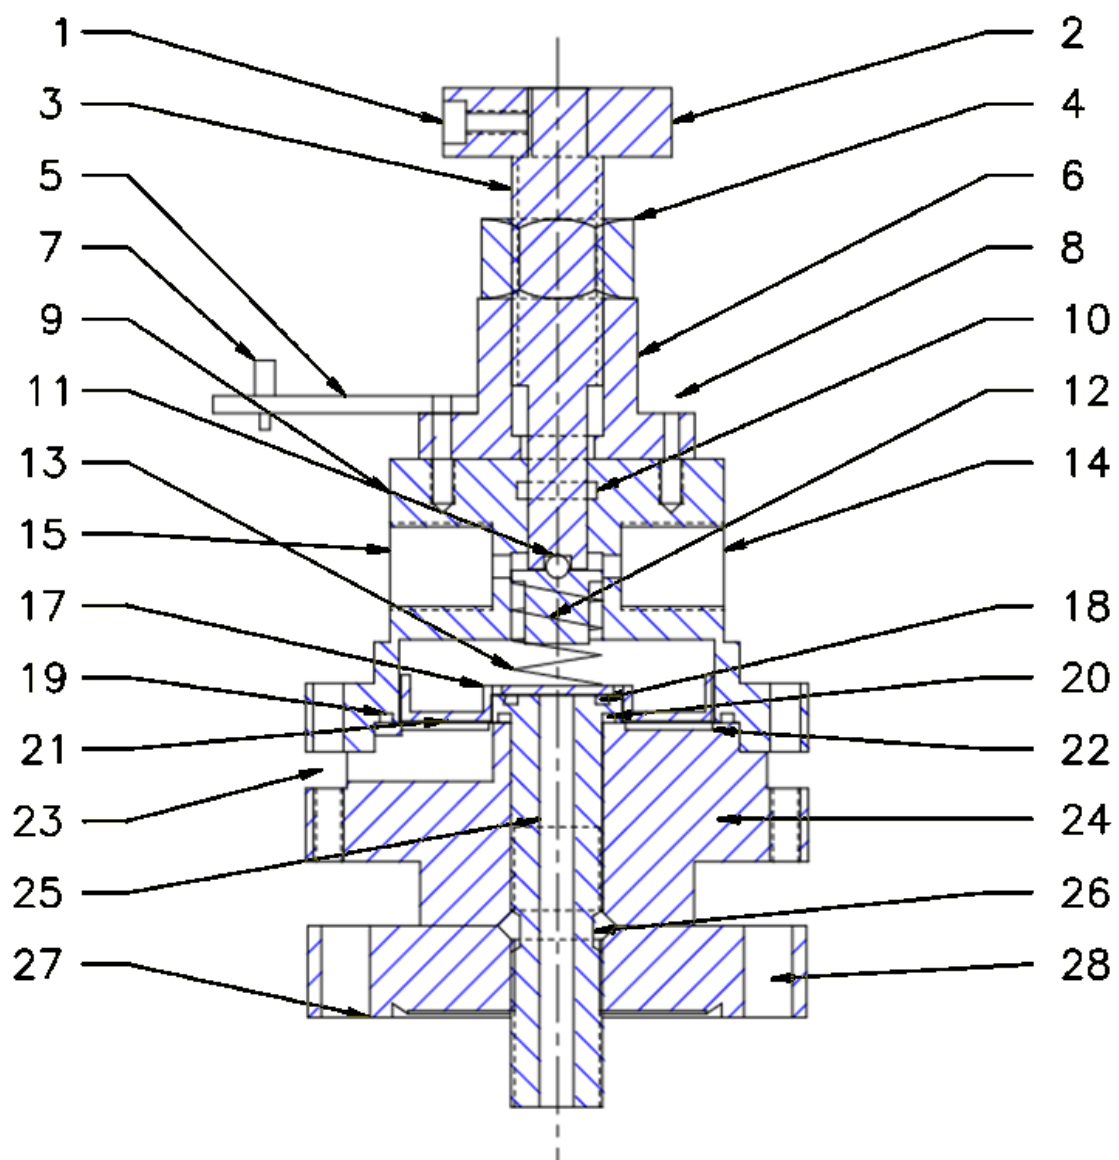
Fast Gas Valve/ Dust Injector Body Schematic
